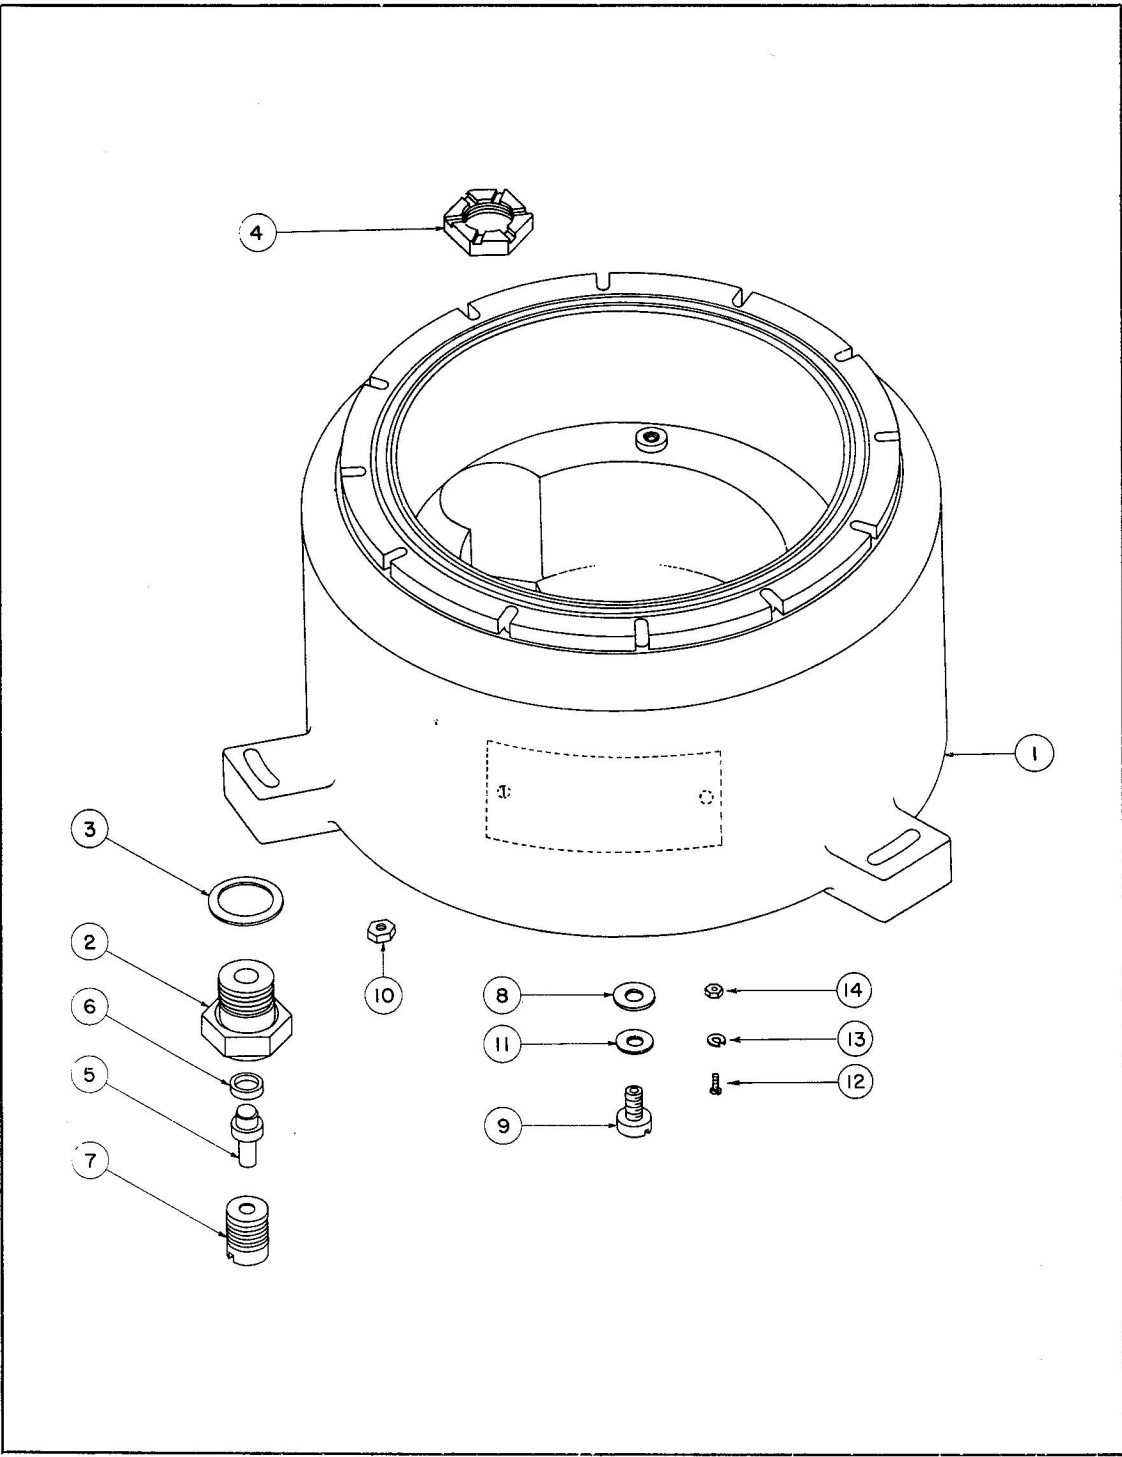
Exploded View - Compass - Compass Bowl and Attaching Parts - Type D-12
